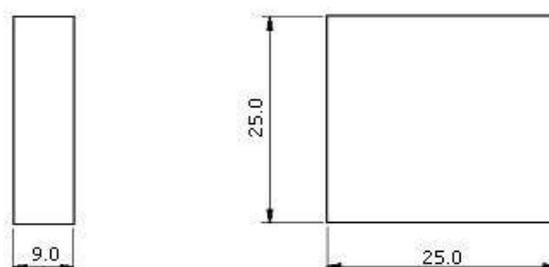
Dimensions (in millimeters) of the specimens after machining and grinding.
